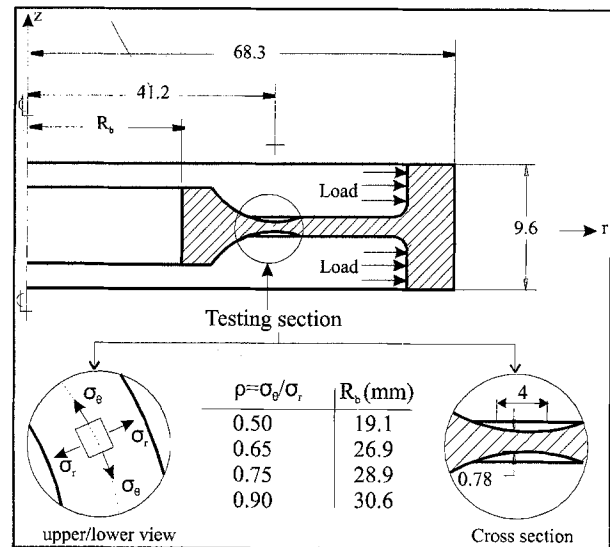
Geometry of a typical disk specimen (dimensions in mm)
